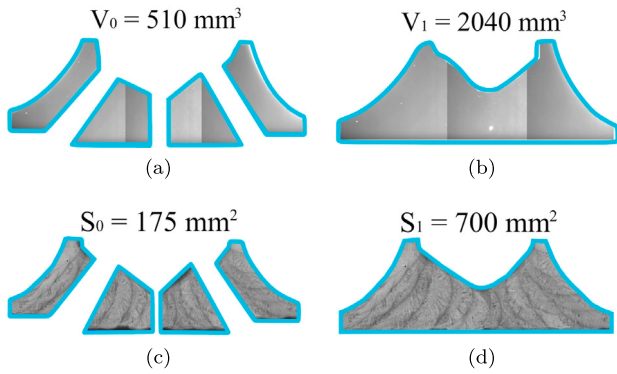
Representation of sampling blocks in the case of a quarter of weld (a), (c) and full weld (b), (d).
